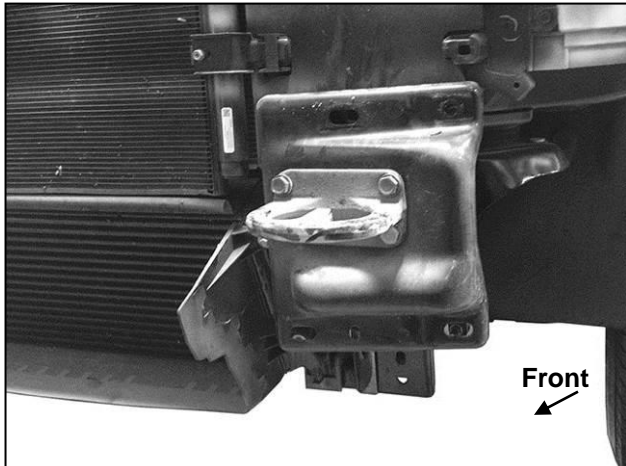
Temporarily remove plastic grille to access top bumper bolts
